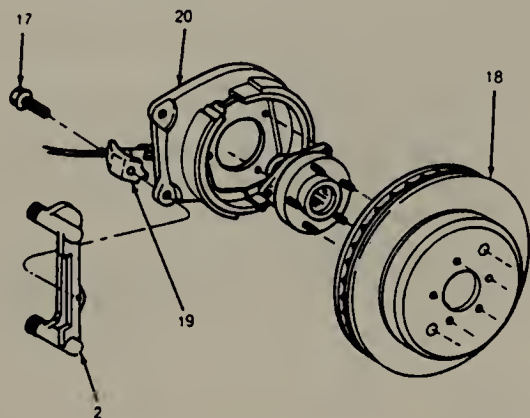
Exploded view of the rear caliper mounting bracket—1987 vehicle shown
